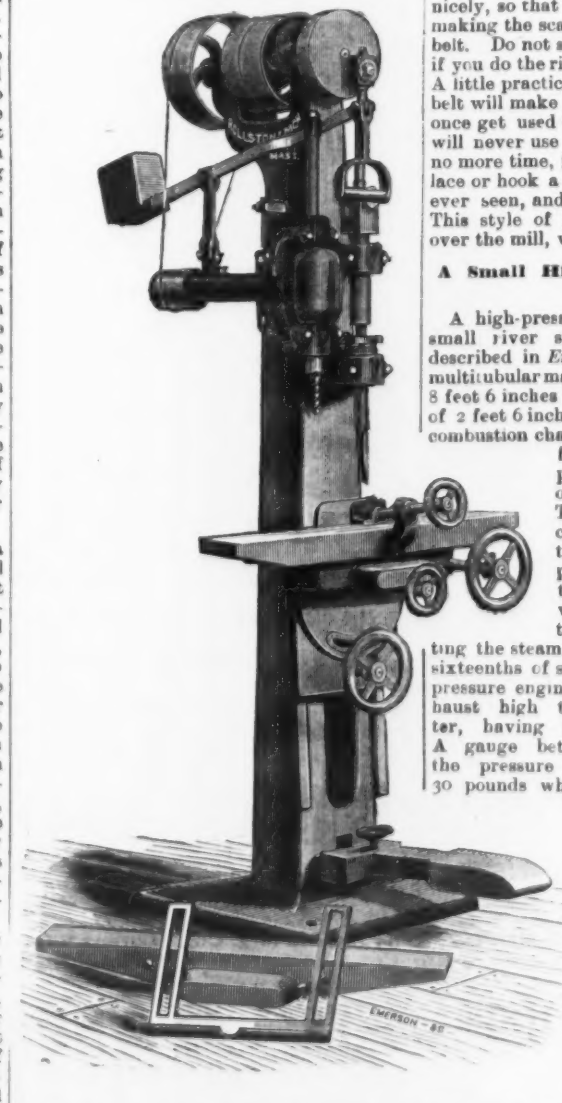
Improved Power Mortiser, Built by the Rollstone Machine Co., Fitchburg, Mass.
